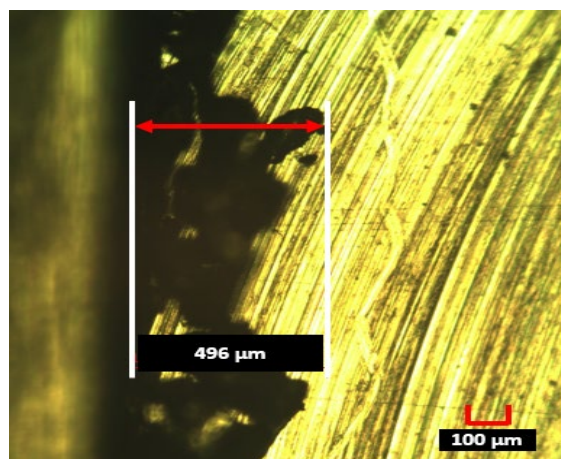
Maximum burr width noted on down-milling side of the workpiece.
